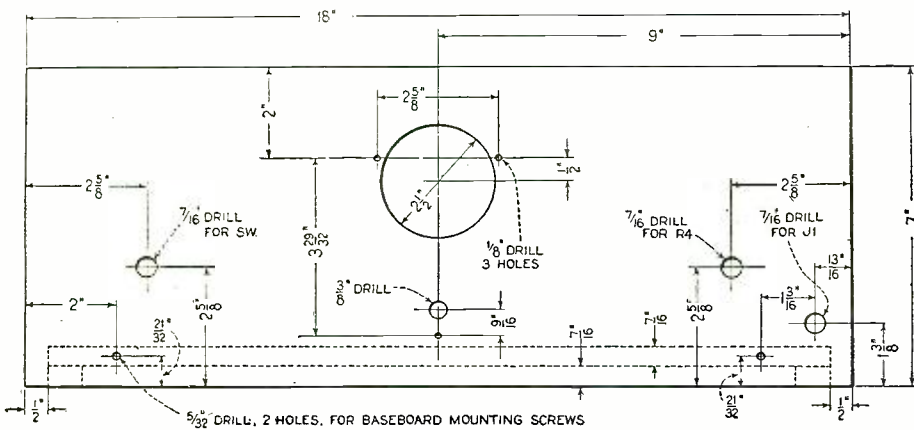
This drilling layout shows the exact location of all holes required for mounting the various parts on the front panel of this receiver.
